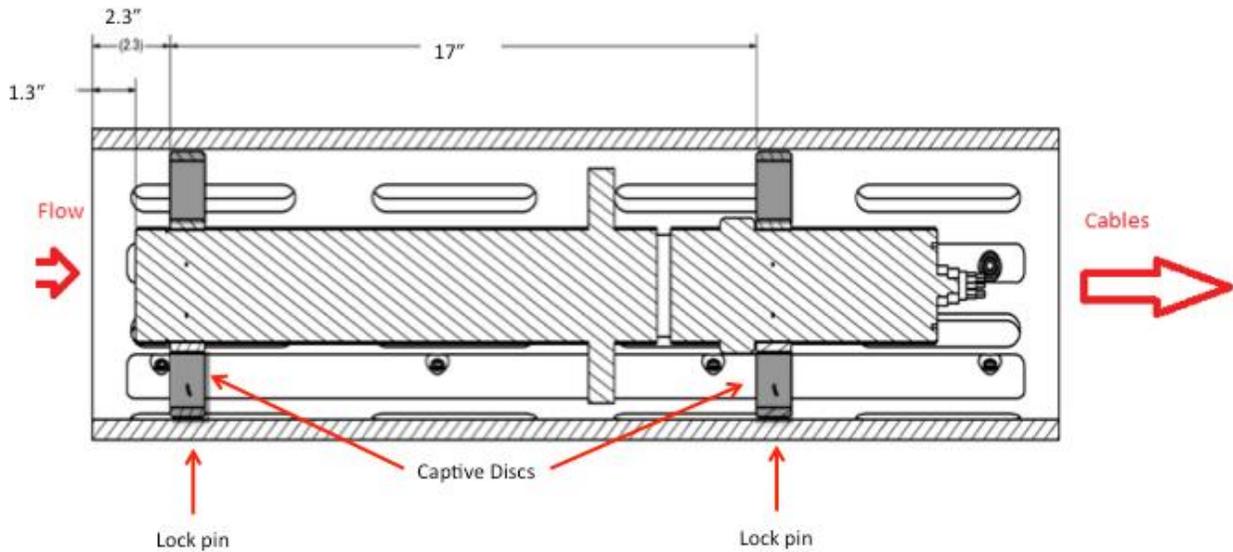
Schematic showing the positioning of the mounting discs on the sensor body
